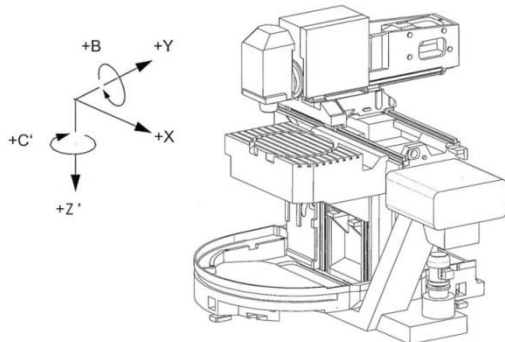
DMU 60 MonoBLOCK milling center with a control axle system
